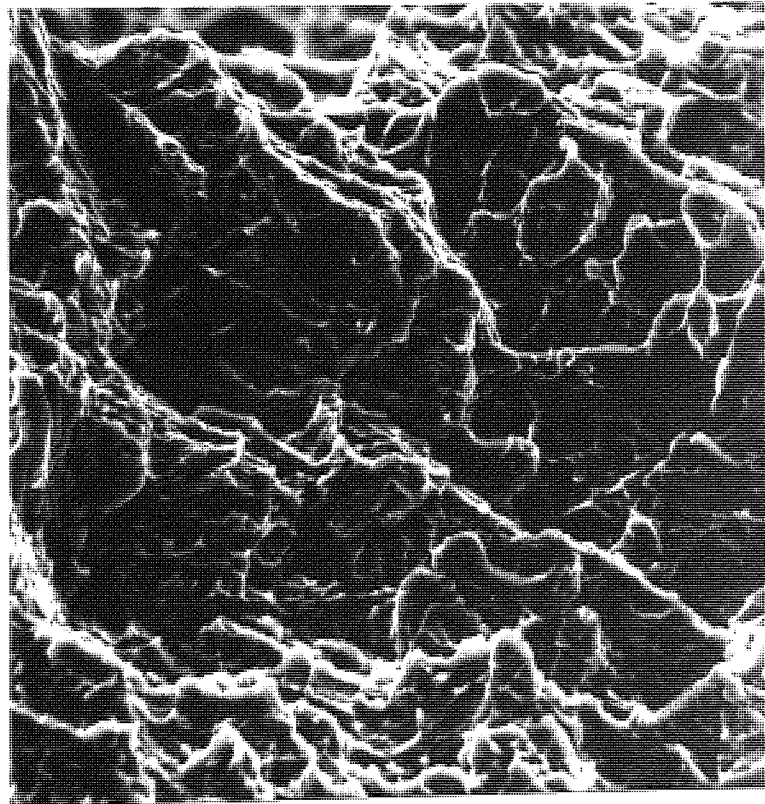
(f) FRACTURE SURFACE OF COOL FROM 1020°C TO 650°C
